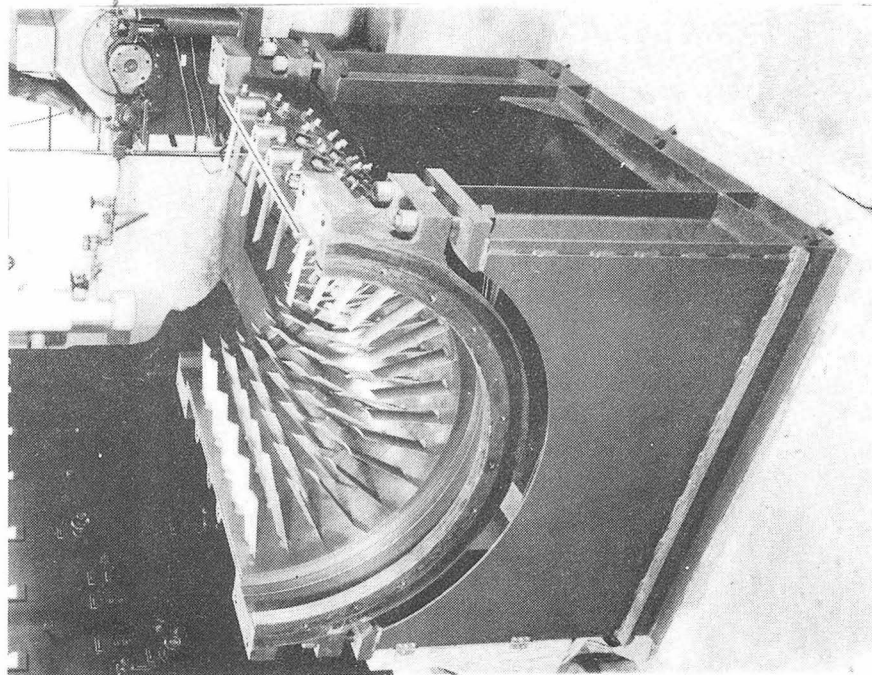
LOWER HALF OF COMPRESSOR CASE
